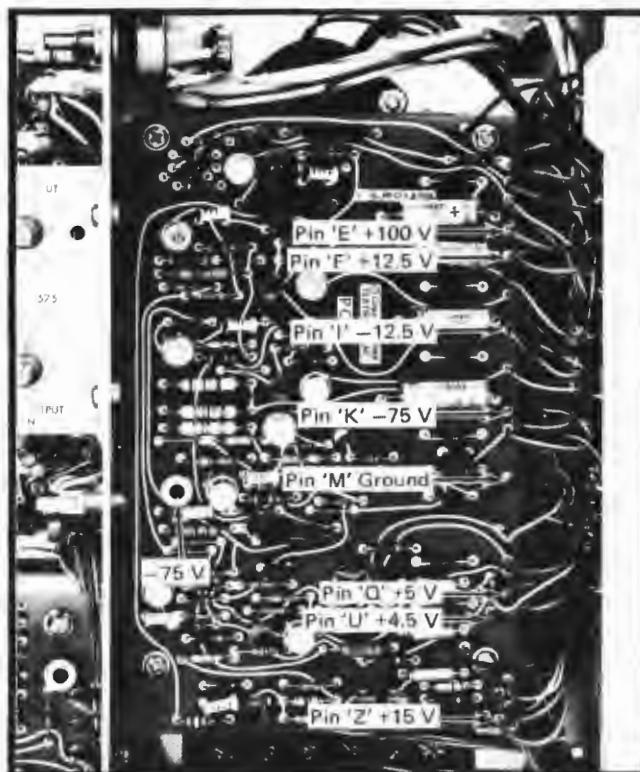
L.V. REGULATOR circuit board: Location of test points and adjustment in steps 1 through 3.
